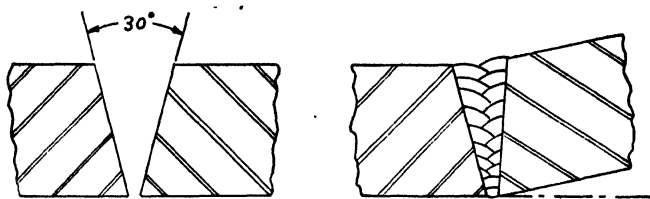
(left). Unsuccessful type of plate preparation for tank manufacture. Fig. 3. (right). Single-V type weld which was discontinued except for test purposes.
